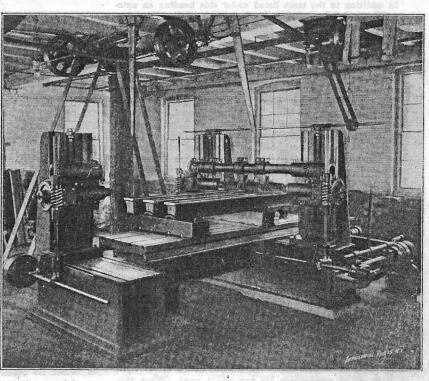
Milling and Boring Machine arranged for Milling Lathe Beds.
